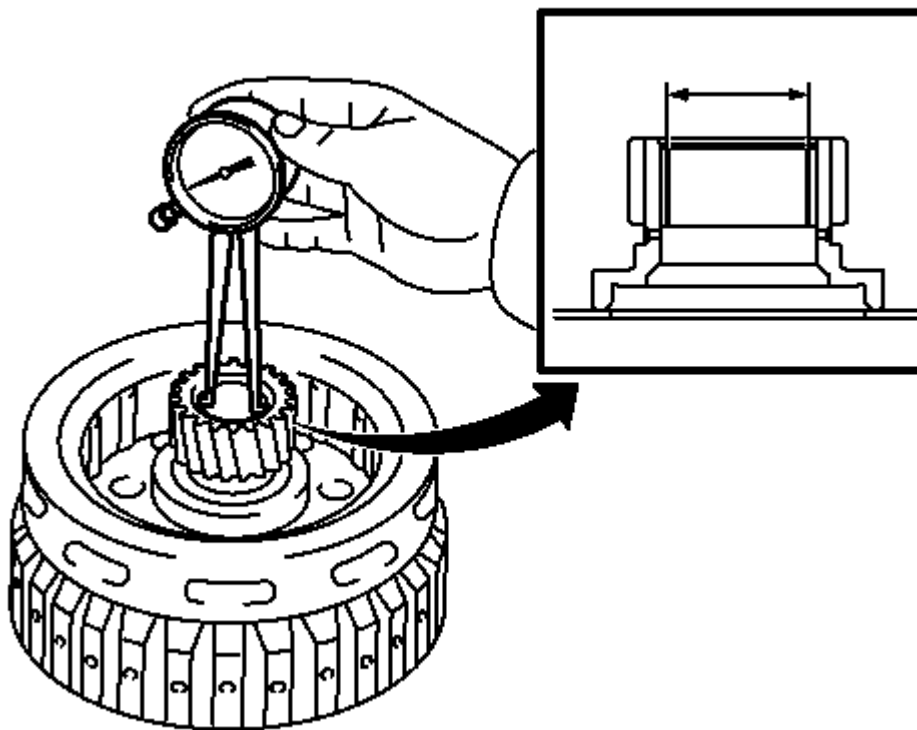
Measuring Inside Diameter Of Rear Planetary Sun Gear Bushing Using A Dial Indicator
